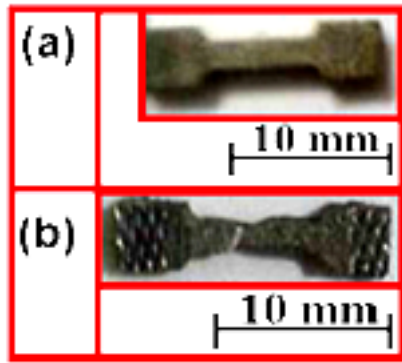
The micro-tensile test sample: (a) prior to the test, and (b) post-testing.
